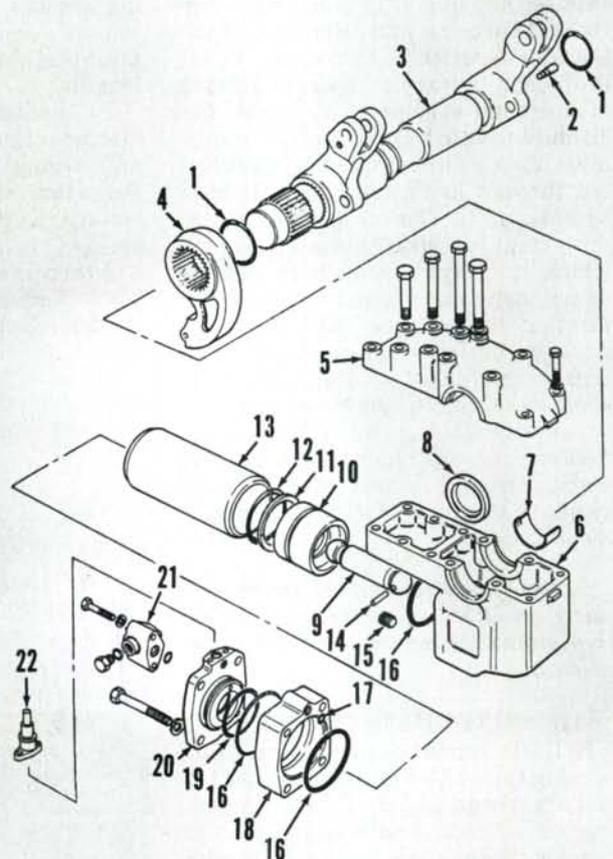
Exploded view of rockshaft cylinder and rockshaft used on 1190, 1290, 1390 and 1490 models. Lift latch mechanism was used on early production tractors. Models 1194, 1294, 1394 and 1494 are similar.
